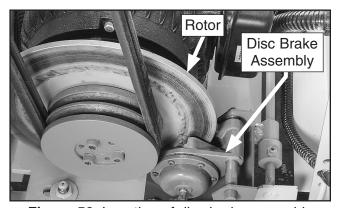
Location of disc brake assembly (lower right access panel removed for access).
